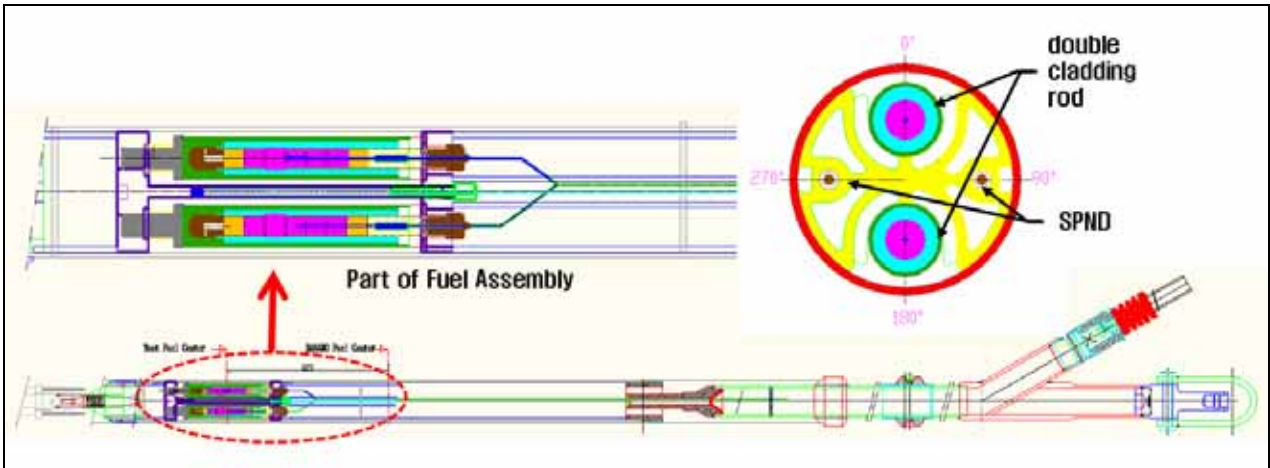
Drawings of an Instrumented Fuel Capsule(09F-08K) for an Irradiation test of the Double Cladding Instrumented Fuel Rods
